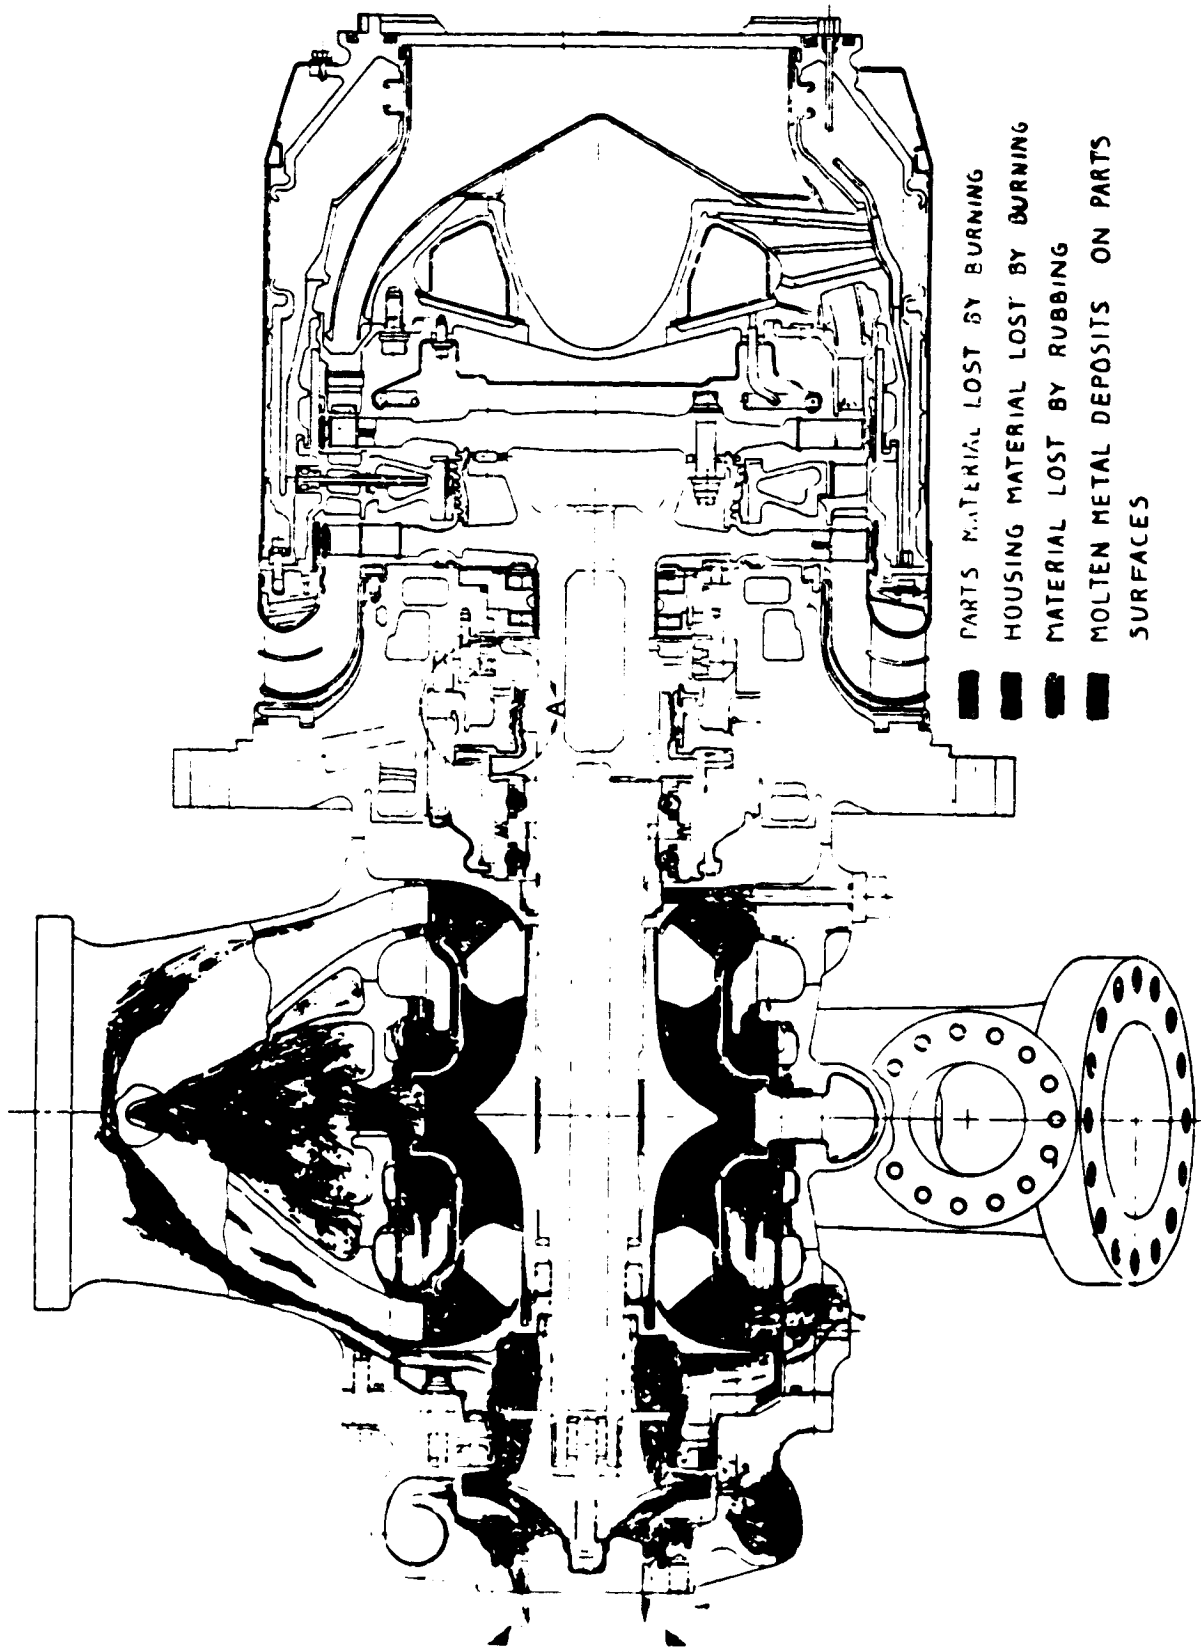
Cross-sectional drawing of high-pressure oxidizer turbopump after fire showing area of damage.
